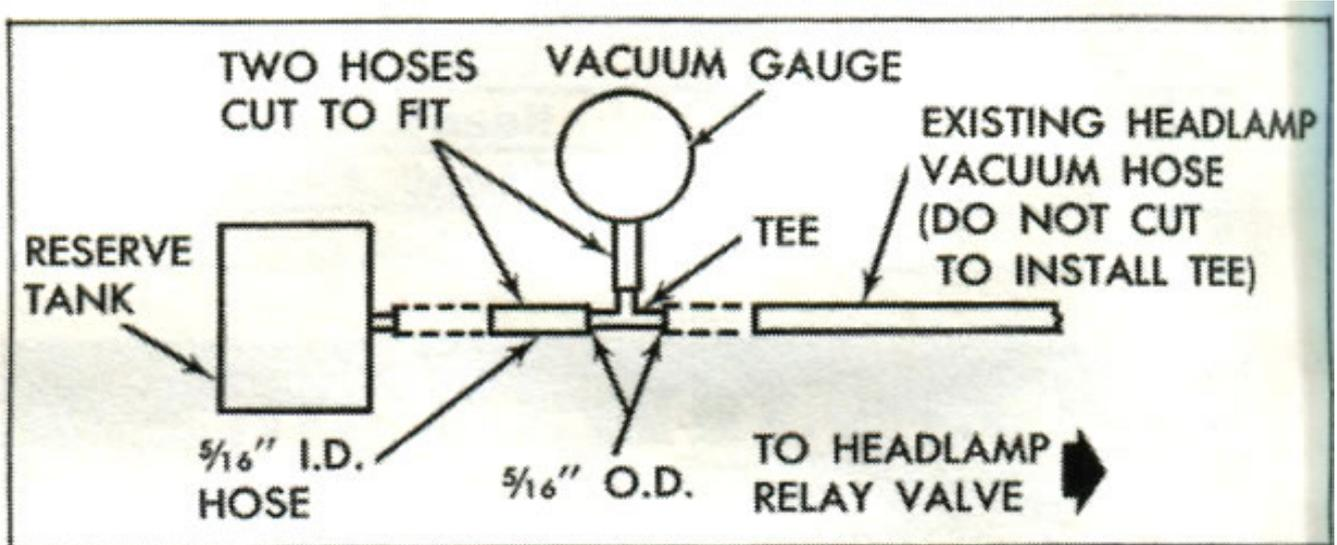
Install Vacuum Gauge Between Vacuum Tank and Supply Hose
